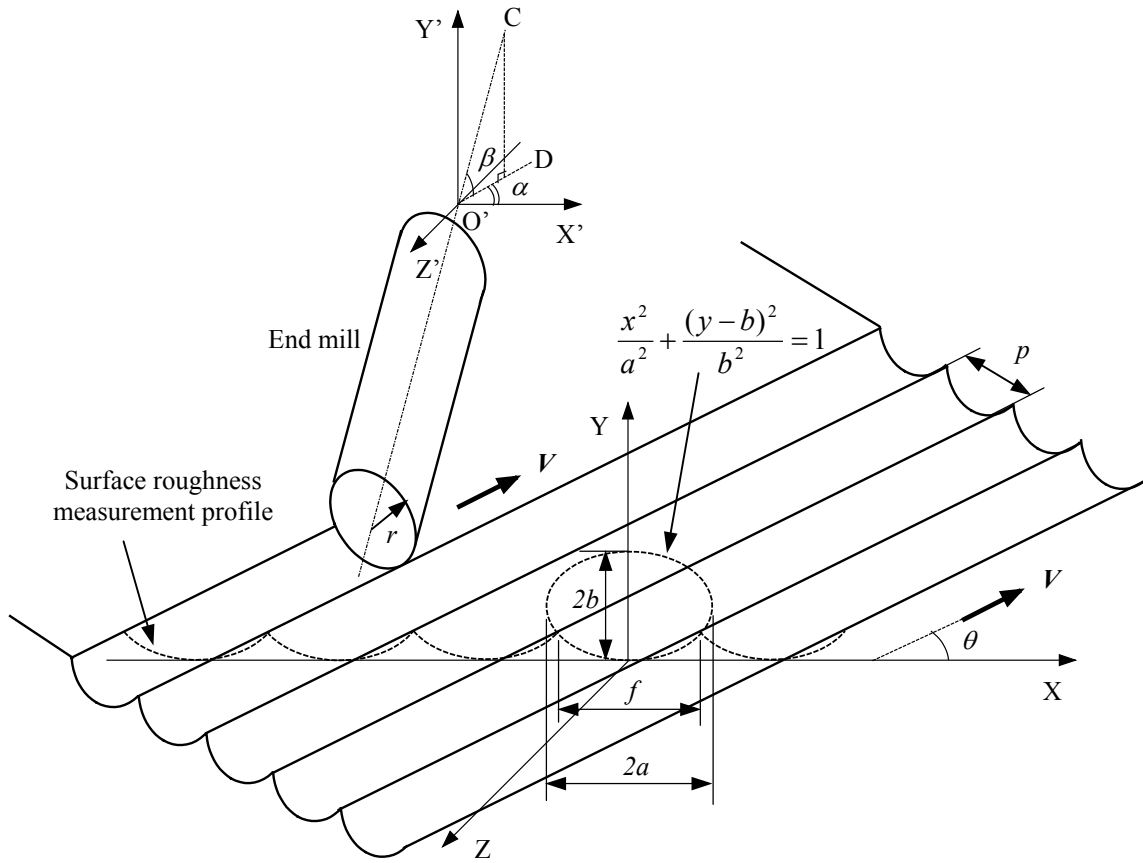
The measurement profile on the surface machined by flat-end milling.
